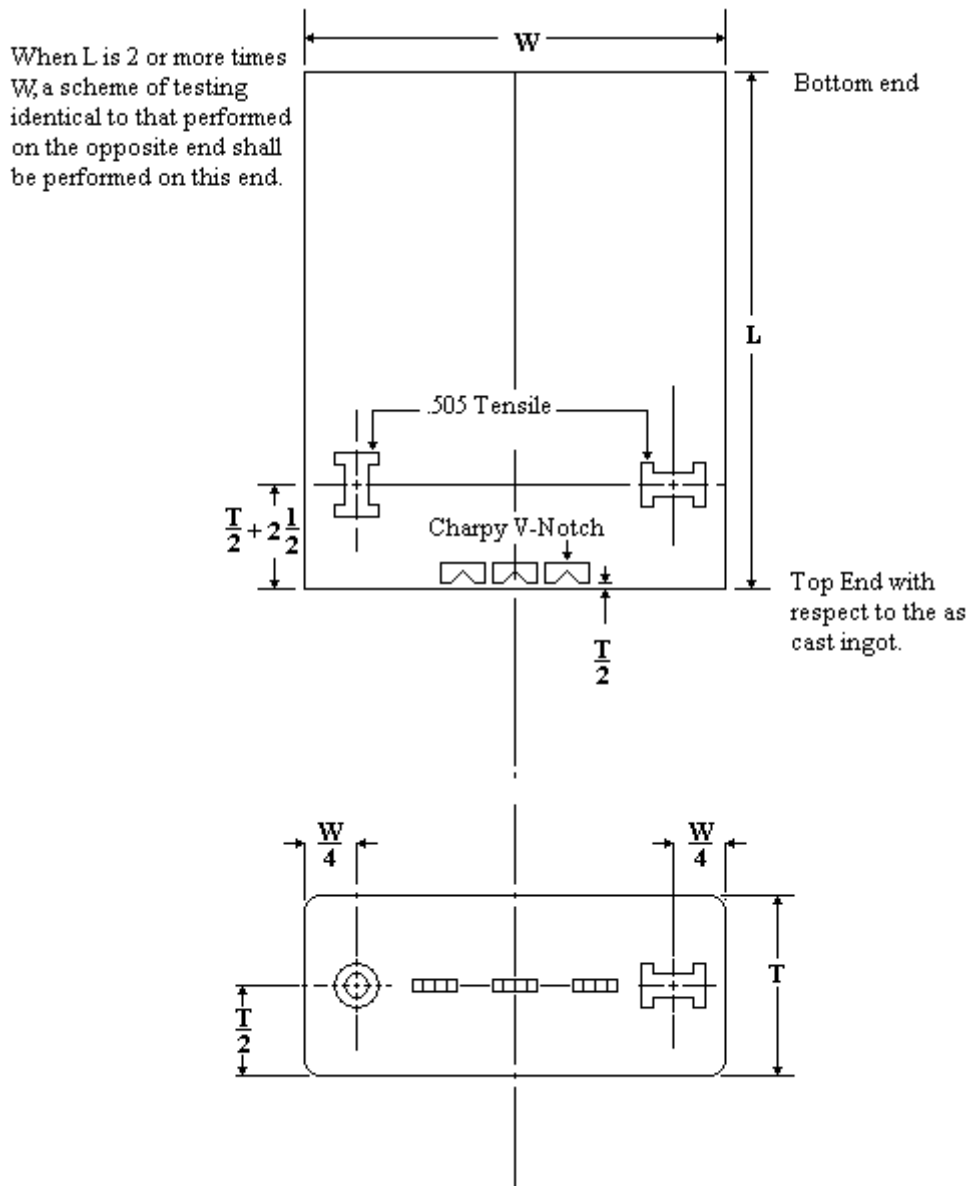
Typical Schematic Diagram of Test Specimen Location for 6-Inch Thick Forgings, “Rectangular Like” in Cross-Section. (See C.4.4.2.2 for details on test specimen location.)
